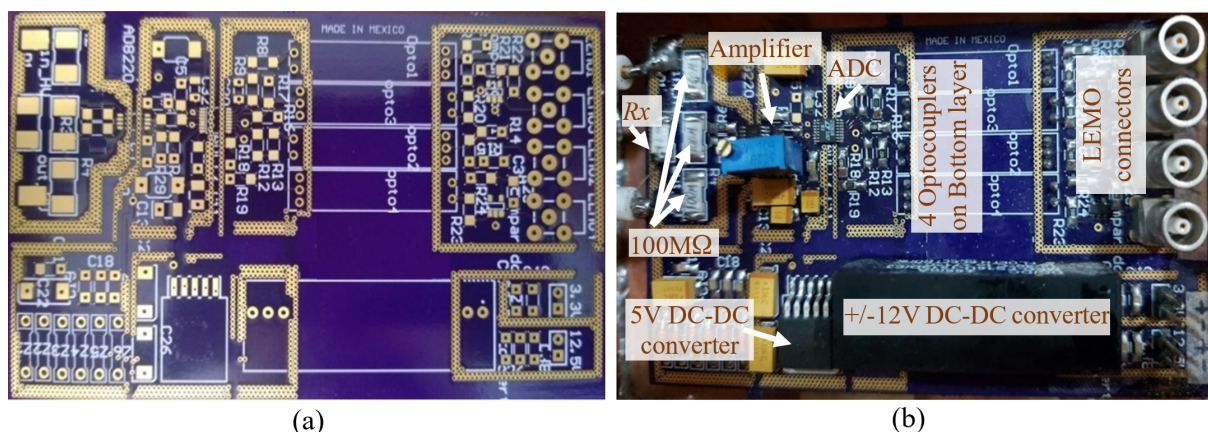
Photo of the PCB. (a) PCB without components and (b) PCB with components mounted.
